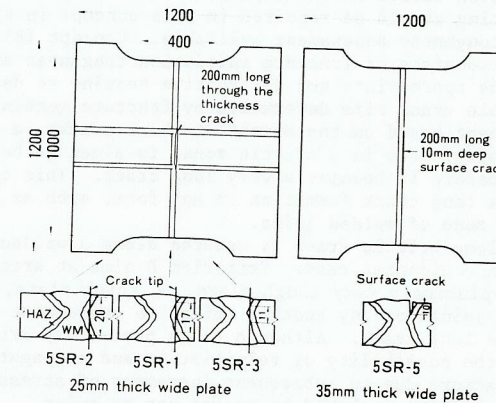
Wide plate specimen for brittle fracture and cyclic loading.
